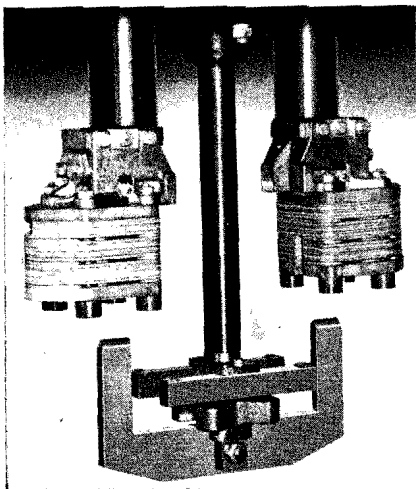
DE-ION GRID CONTACT ASSEMBLY, TYPE F-100, 1200-AMPERE BREAKER
